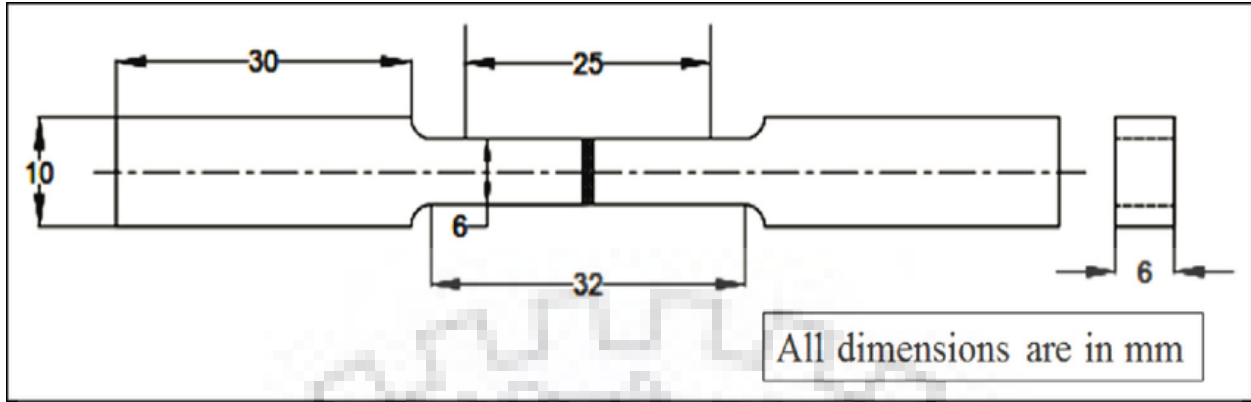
ASTM standard of tensile test specimen
